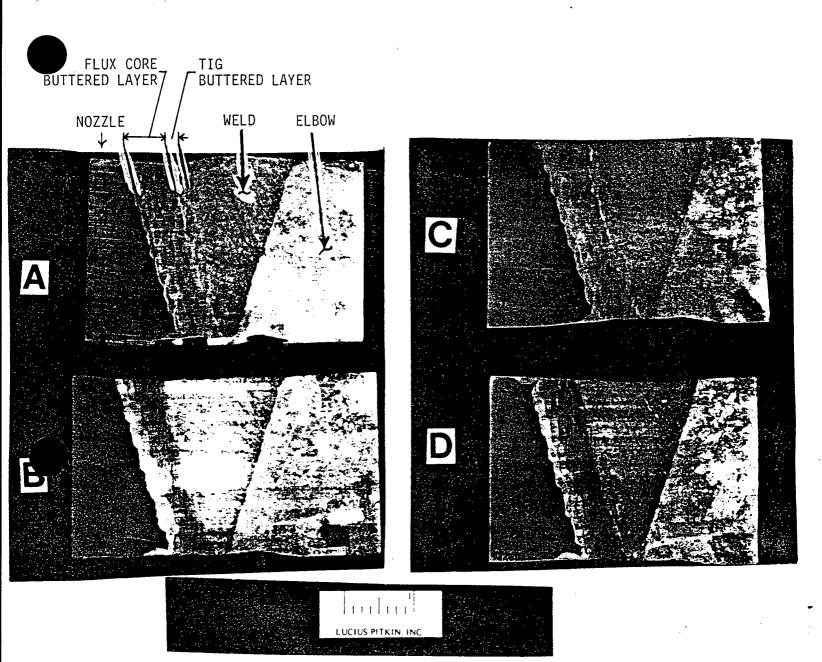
Shows four transverse macrosections cut from JAP-4 simulated nozzle-elbow mockup. Nozzle portion was buttered with flux core stainless followed by TIG deposited stainless prior to welding to elbow. No defects were observed.
